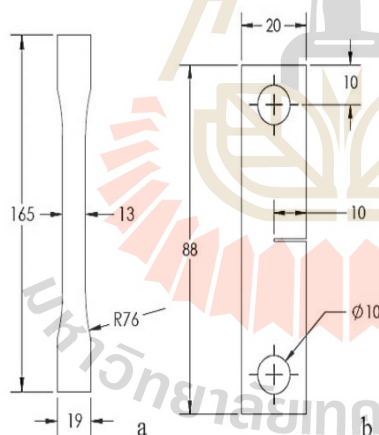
(a) Tensile specimen and (b) Fracture toughness specimen.
